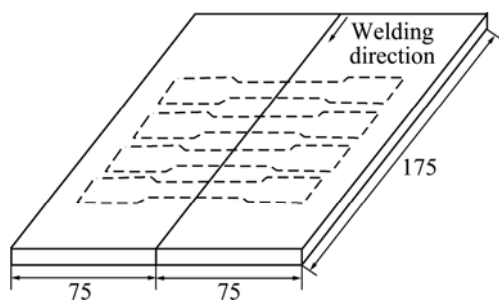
Scheme of welding and extraction of tensile specimens (unit: mm)
